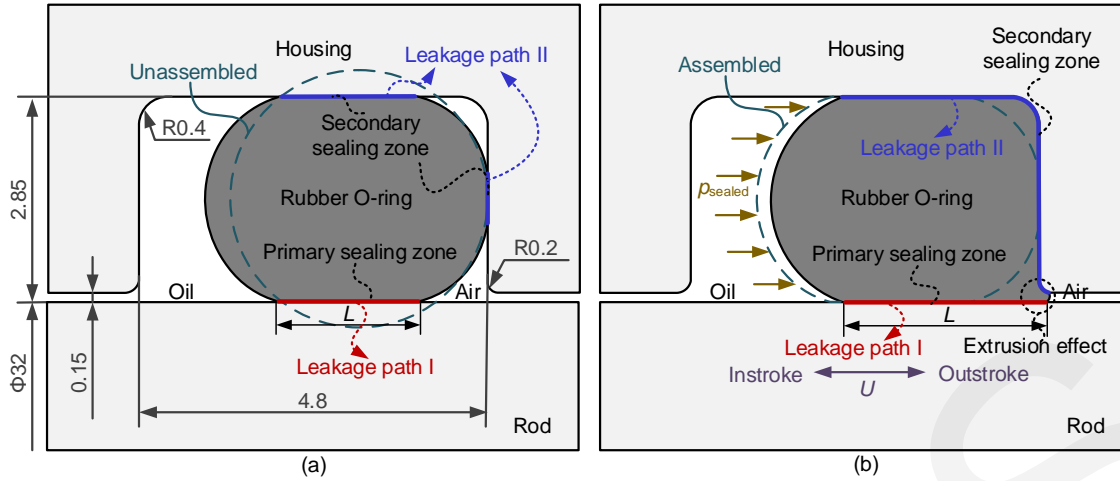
Geometry of a hydraulic O-ring rod seal without (a) and with (b) sealed pressure (p_{sealed}) (Unit: mm).
